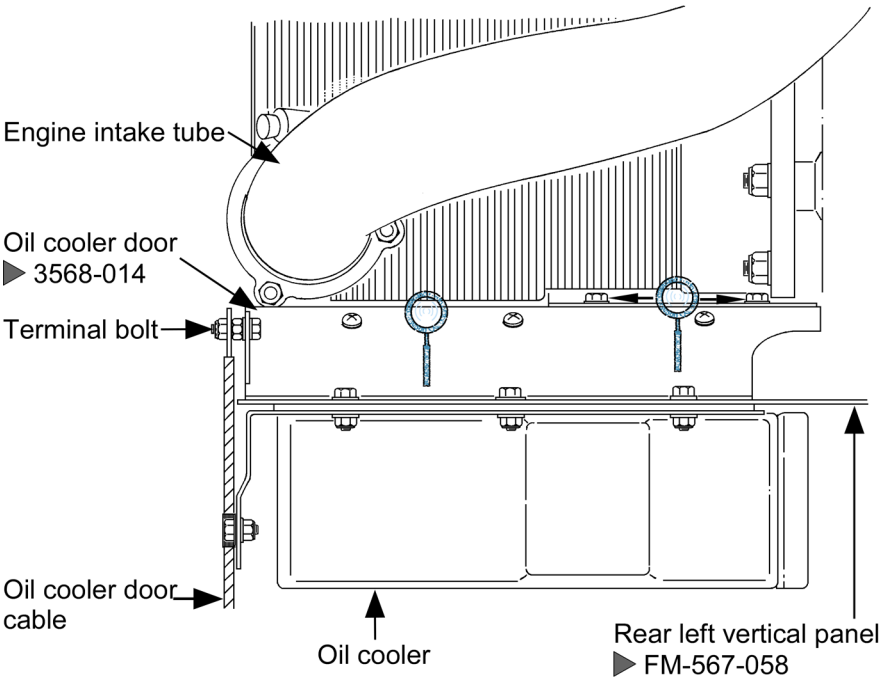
C.8 below is a top view of the oil cooler and the oil cooler door you just installed. The two magnifiers represent the position of the next baffling pieces in the two detail view illustrations, Figure 26.3.C.9 on the right side of this page and Figure 26.3.C.10 on the next page.
